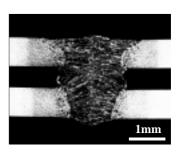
Cross section of lap joint by hybrid welding (Laser output; 3kW, Arc current; 100A, Welding speed; 3.0m/min)
